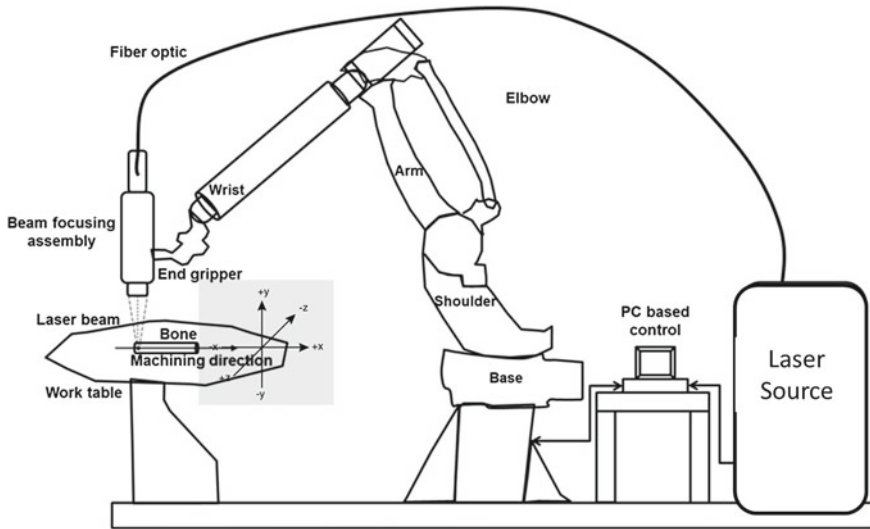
Setup for robot assisted laser machining of bones [45]
